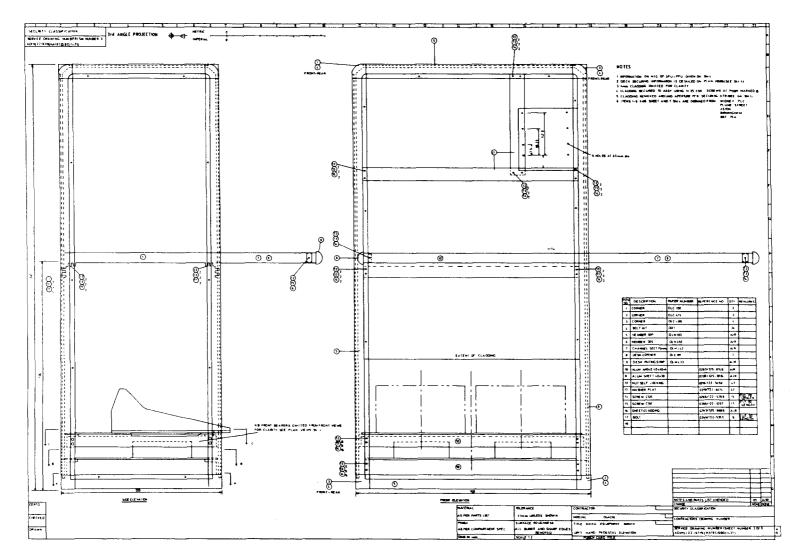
TYPICAL CAD OUTPUT: HELICOPTER ACOUSTIC ANALYSIS UNIT EQUIPMENT BENCH
